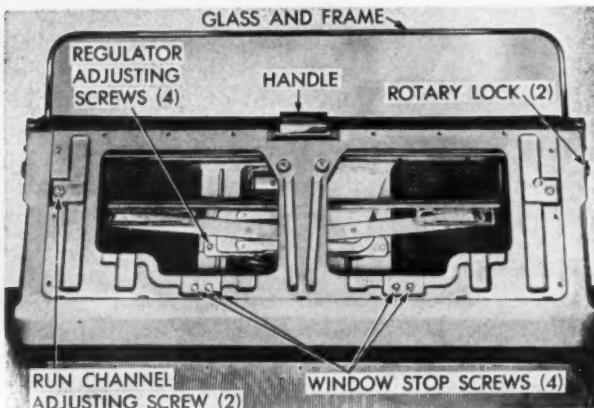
Tailgate adjustment and aligning points (Chrysler Corp. cars).
